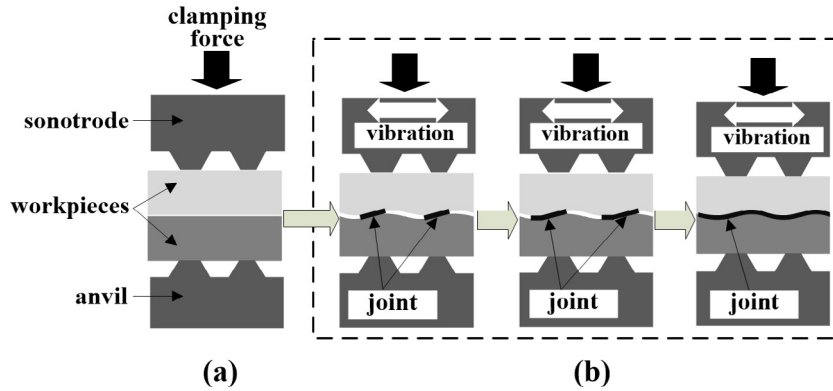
An illustration of USW process: (a) clamping step and (b) welding step.
